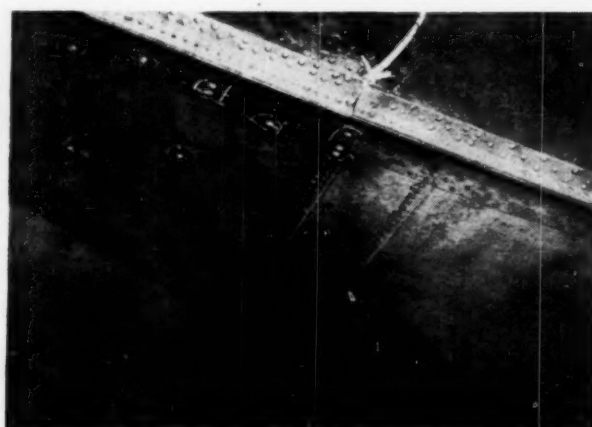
AIRPLANE J: CORRODED WING-MOUNTING ANGLE JOINT ON CENTER LOWER OUTBOARD ANGLE LEFT-HAND SIDE; WING STATION 142
